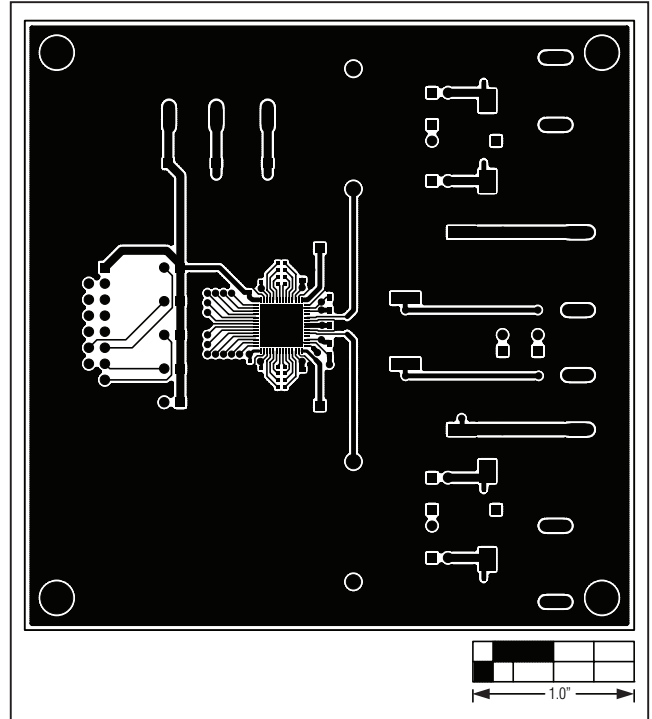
MAX4940 EV Kit PCB Layout—Component Side
